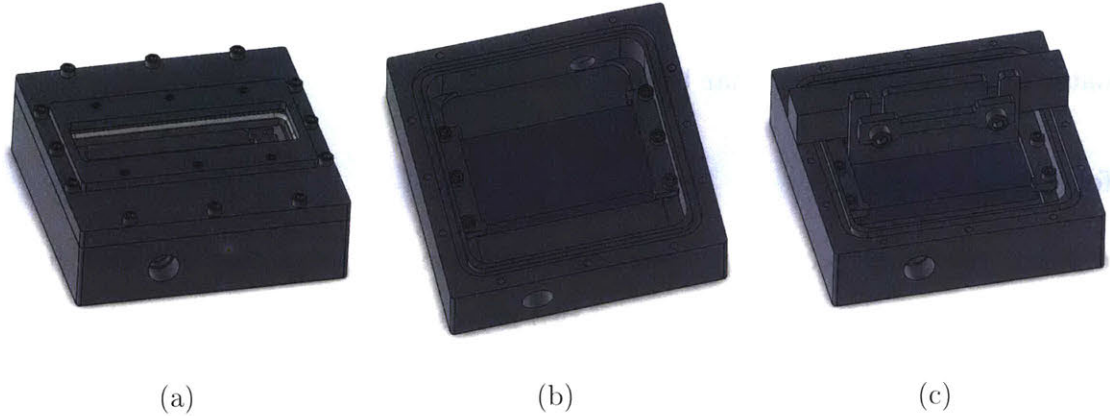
CAD model of the (a) assembled sample holder, a view of the (b) internal cavity, and (c) with the recoater assembly in place.
